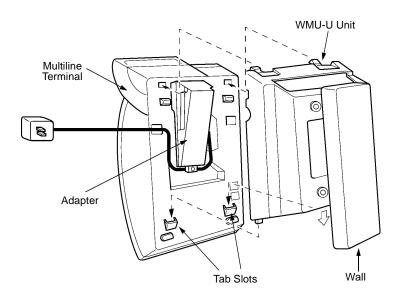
Attaching the Multiline Terminal to the WMU-U Unit
